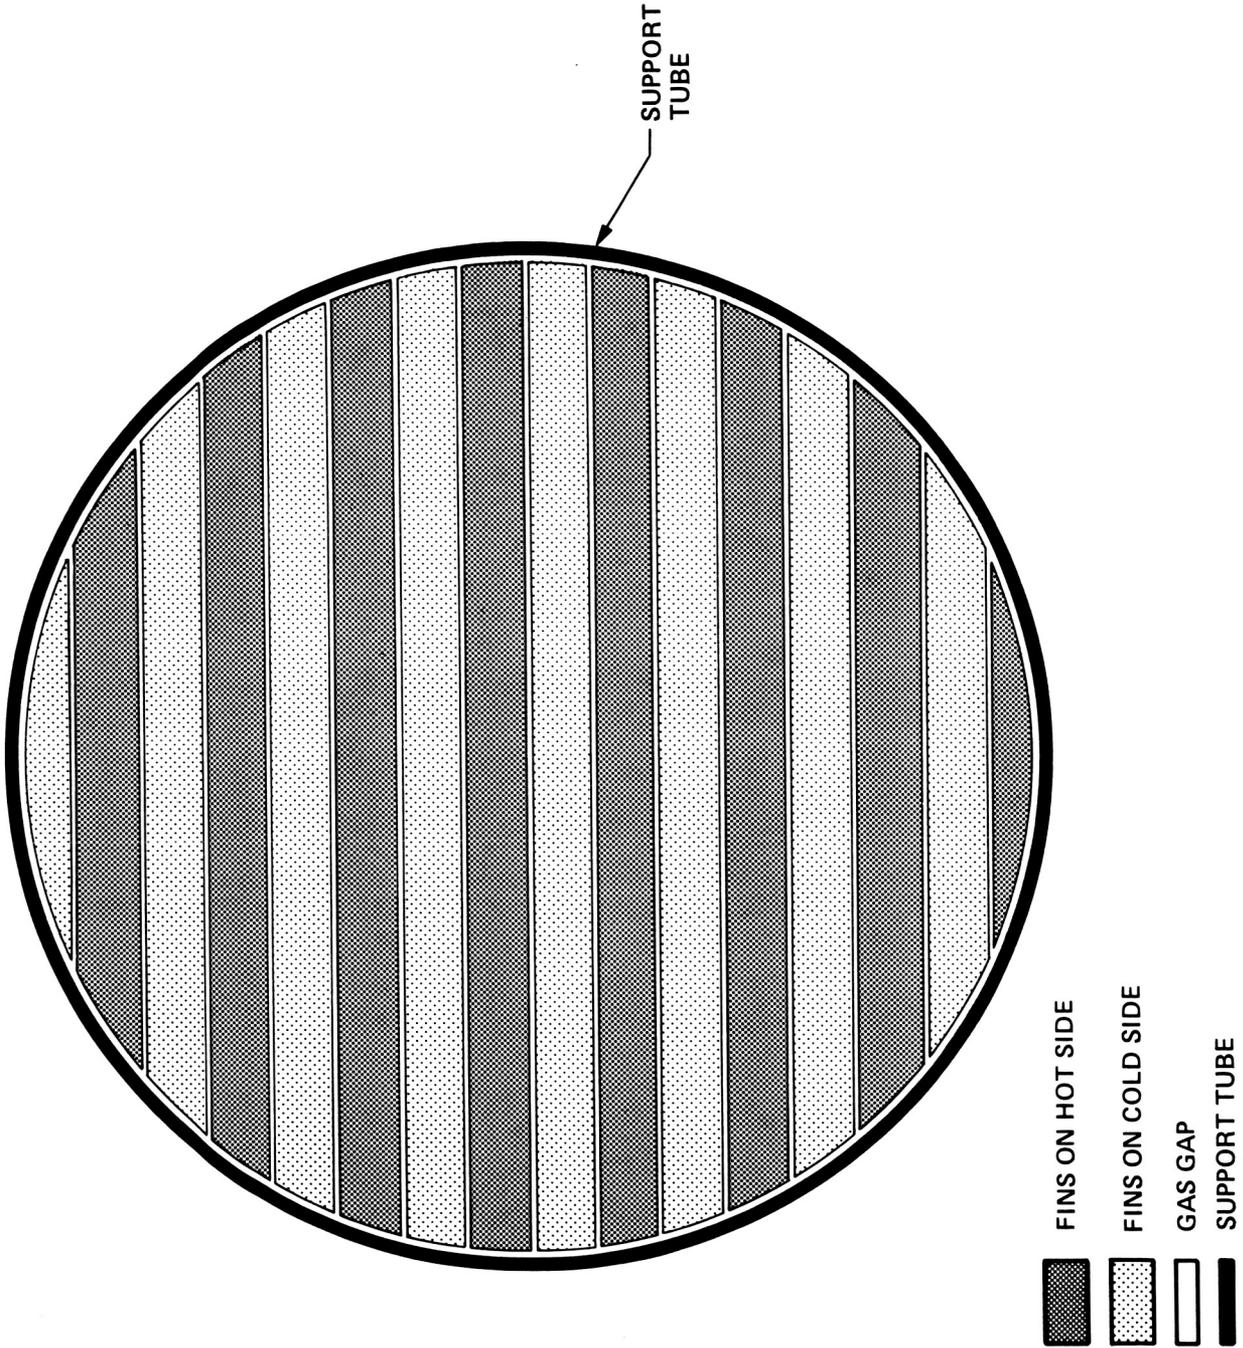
Cross-Sectional View of a Straight Fin Heat Switch
